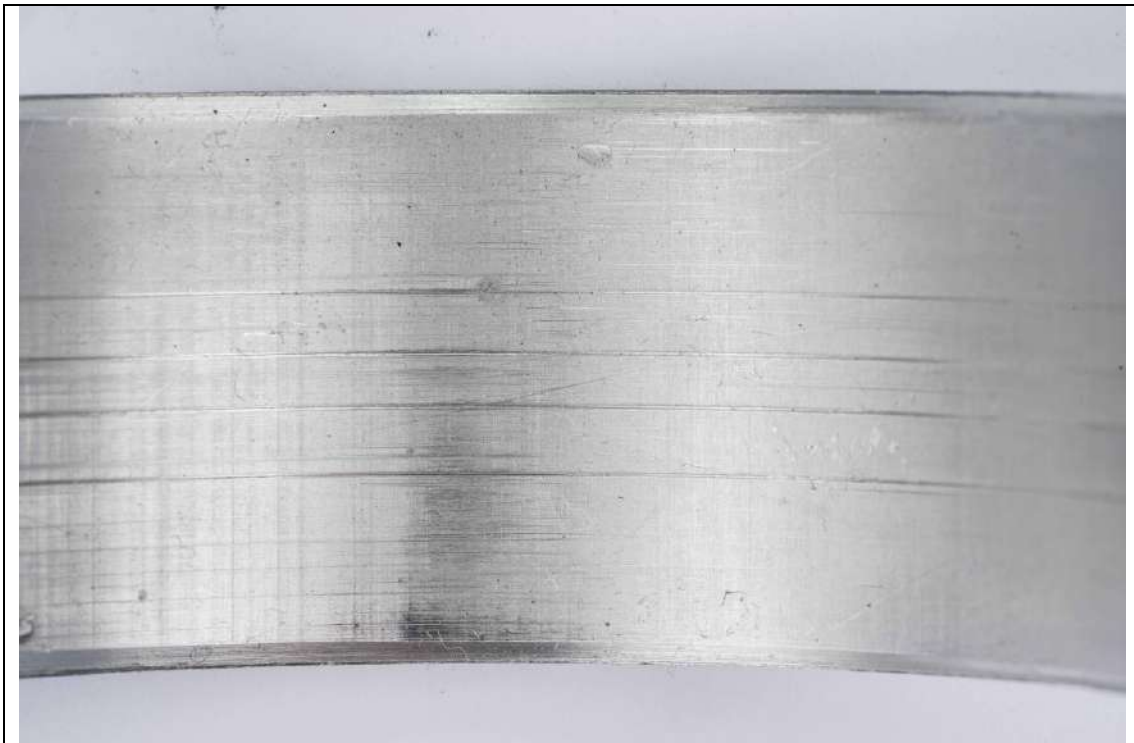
Crankshaft bearing shells with artificial defects
